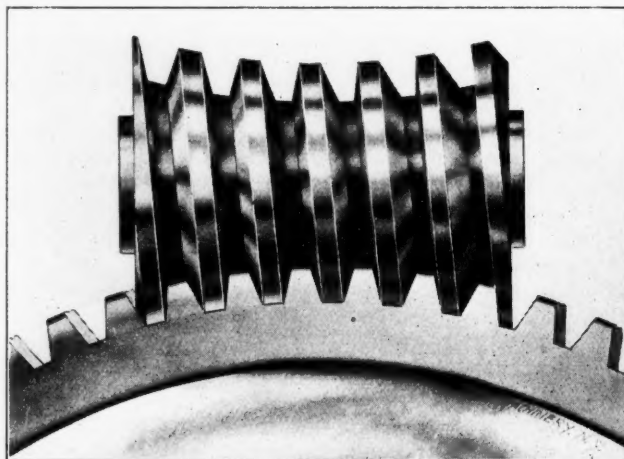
Typical Hindley Worm and Worm-wheel cut on S. & S. Hobbing Machine
